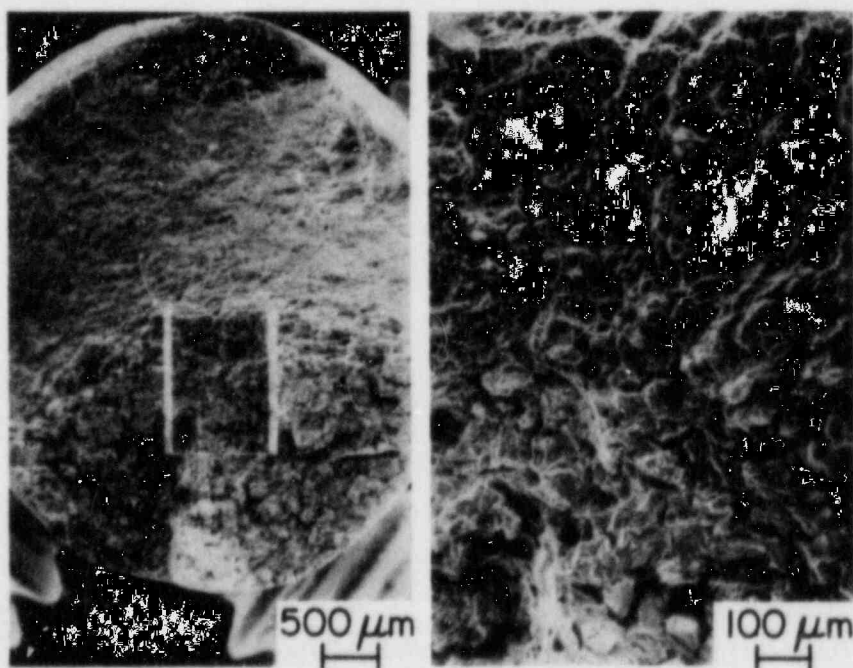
Fracture Surface of Type 304 SS CERT Specimen Tested at 289°C and  $\dot{\epsilon} = 2 \times 10^{-6} \text{ s}^{-1}$  after Aging at 450°C for 1000 h.
